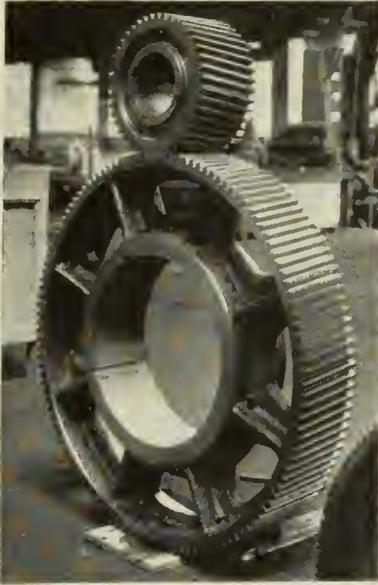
Single Helical Ring Gear for Suction Roll Drive.
